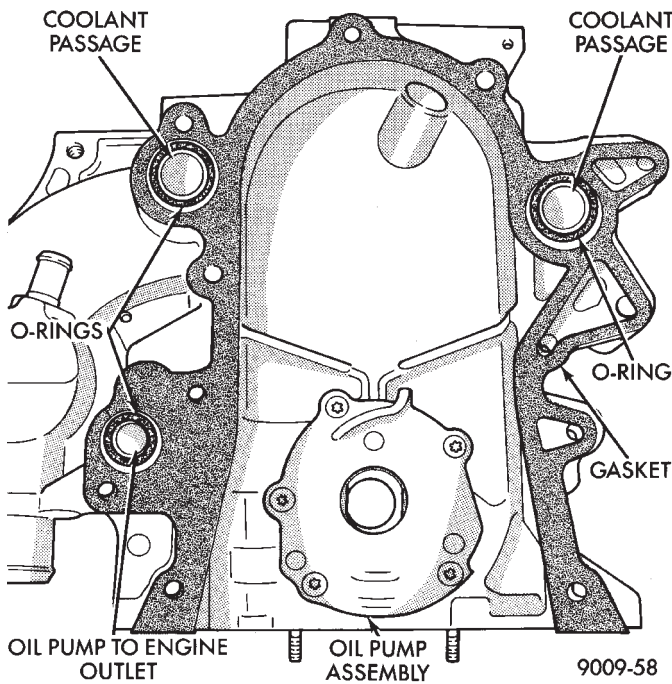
Timing Chain Case Cover Gaskets and O-Rings
